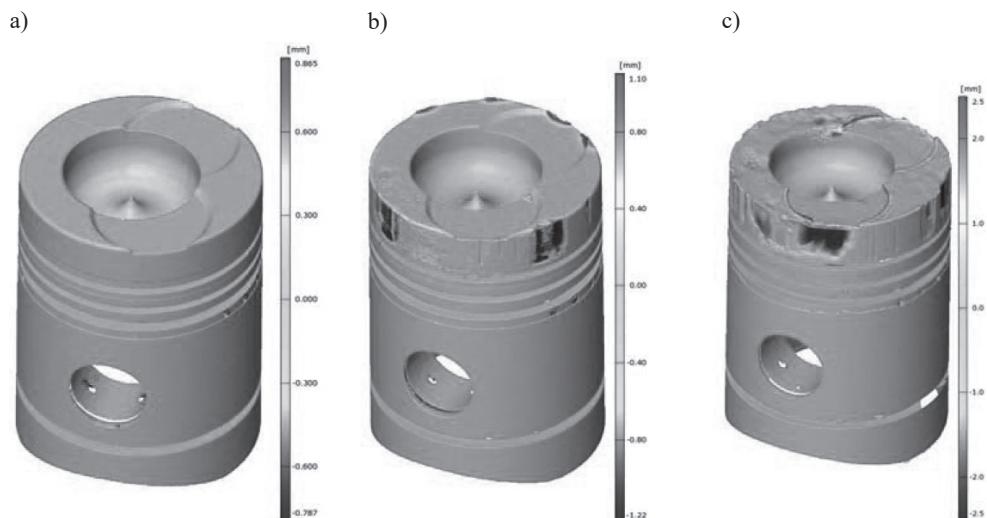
Engine pistons SW-680: a) the new engine; b) a piston with a damaged side surface; c) a piston with a damaged surface and burns of a piston top [6]
